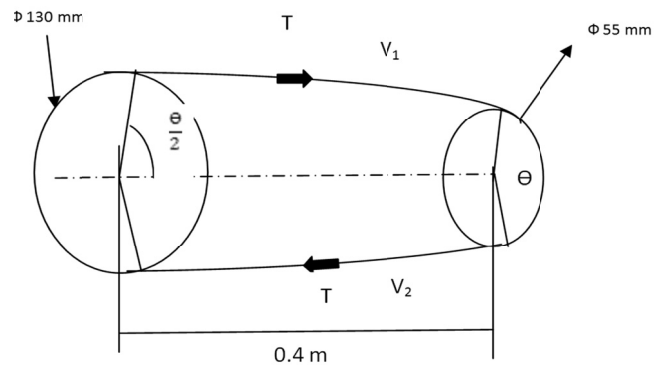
Belt and pulley arrangement for power transmission on the machine
